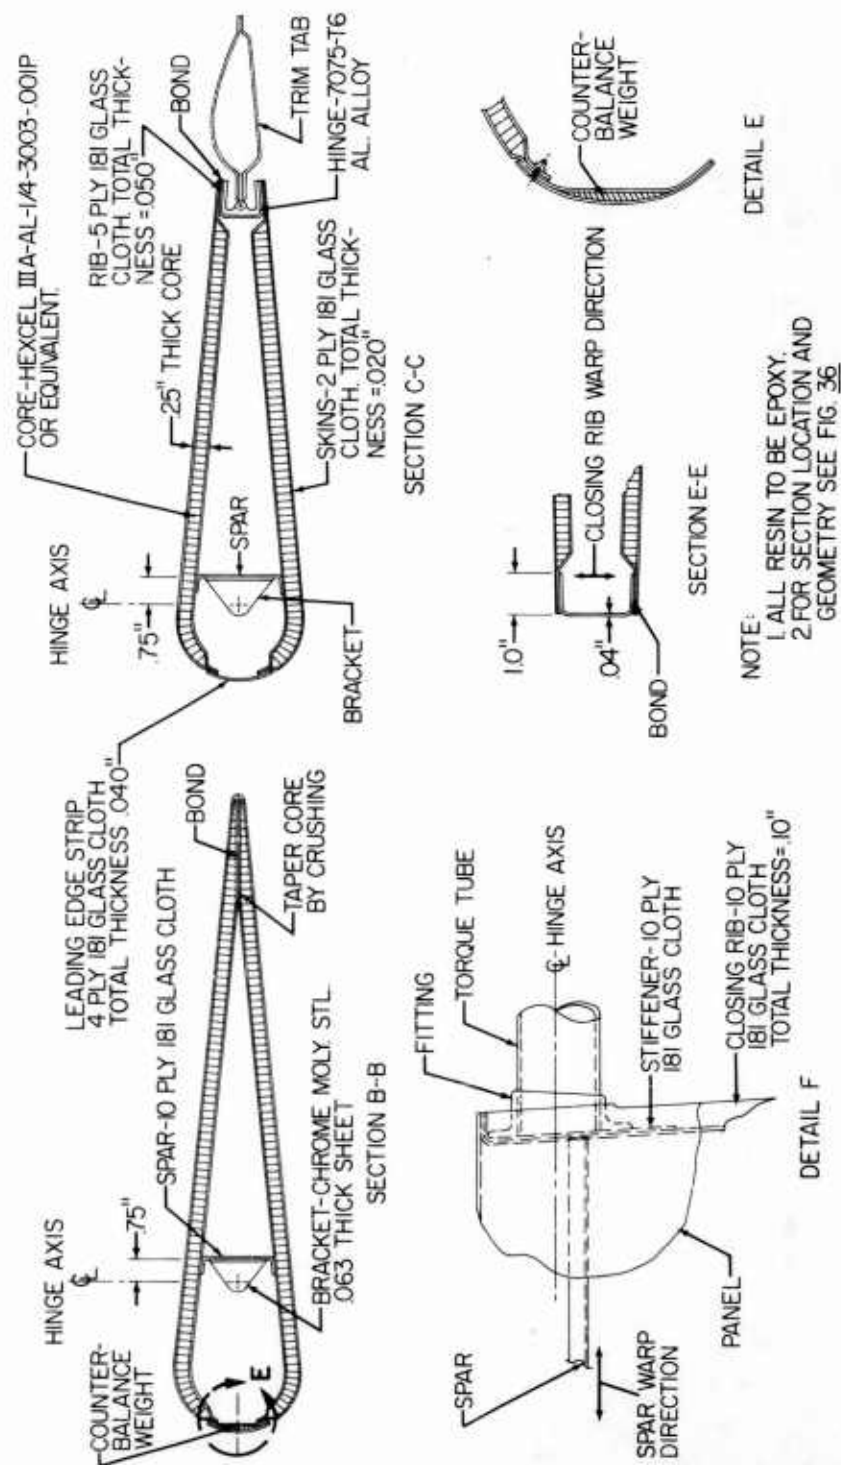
L-23 ELEVATOR OF REINFORCED PLASTIC
